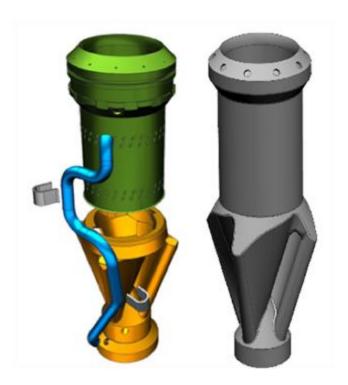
SIEMENS BURNER HEAD 13 PARTS COMBINED TO ONE PART (SOURCE: SIEMENS AG).
